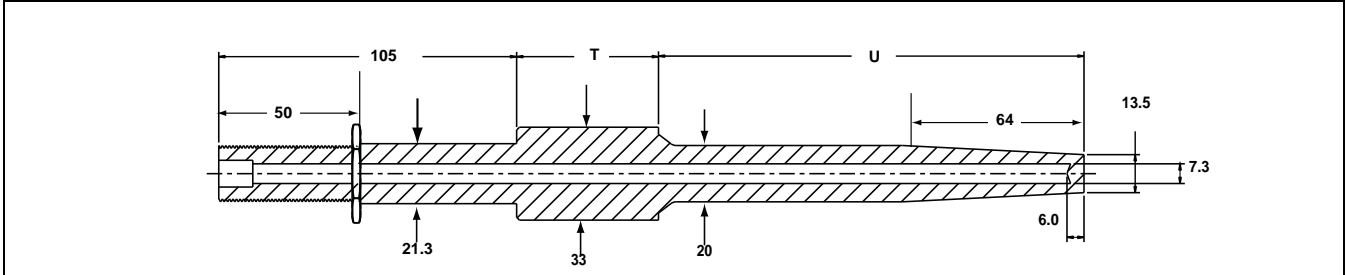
Welded Barstock Thermowell (6 mm)
